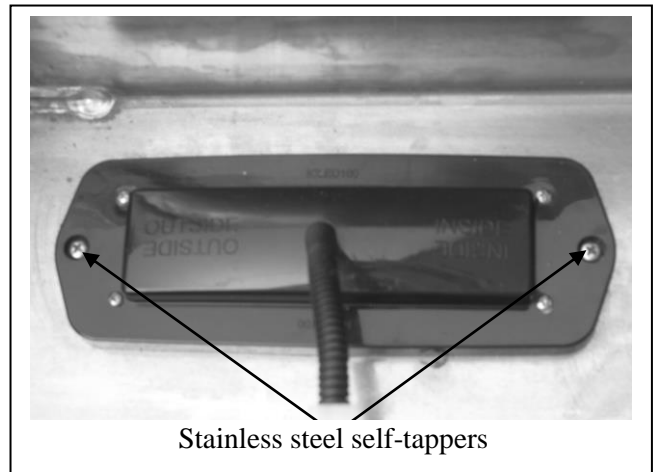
Using ECB mount as a guide, drill remaining holes to 10mm.
